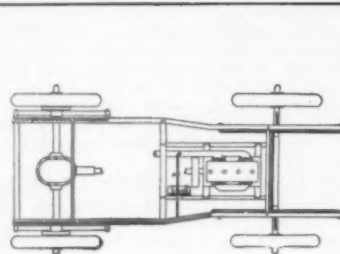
Motor-vehicle lubricating system, designed by P. H. Gaskins
